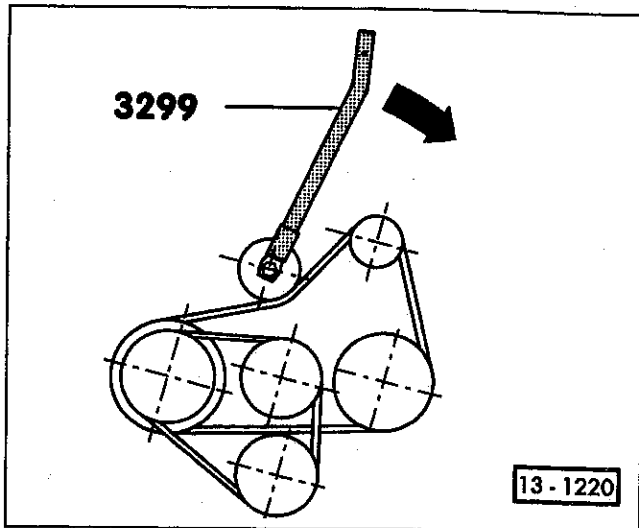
4-cyl. engine with belt tensioner: Belt tensioner being lifted with spanner wrench (Volkswagen special tool no. 3299).
